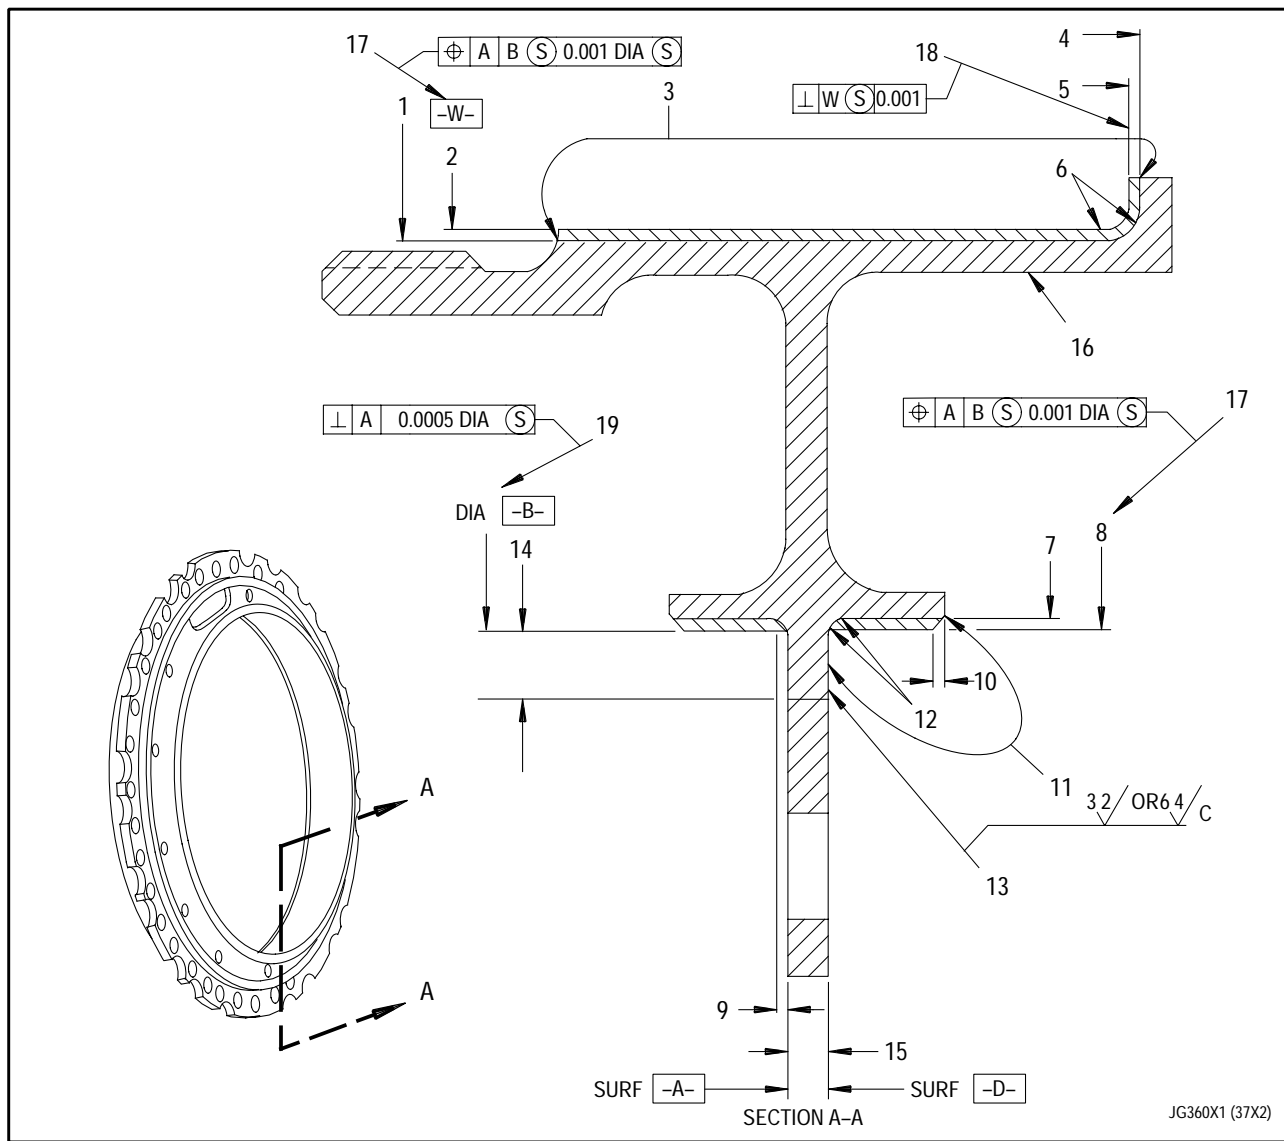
No. 4 Bearing Housing - Nickel Plating Repair
